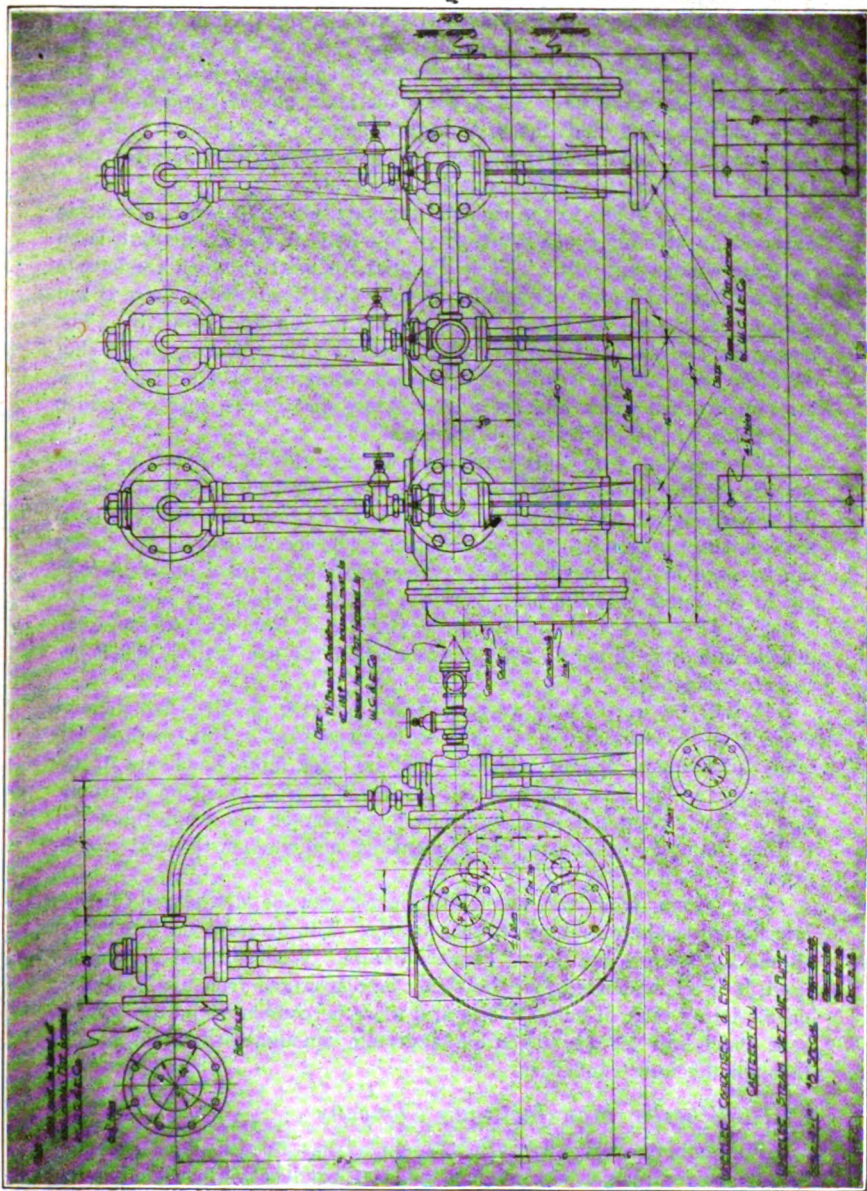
WHEELER C. & E. Co. TRIPLE STEAM JET AIR PUMP
